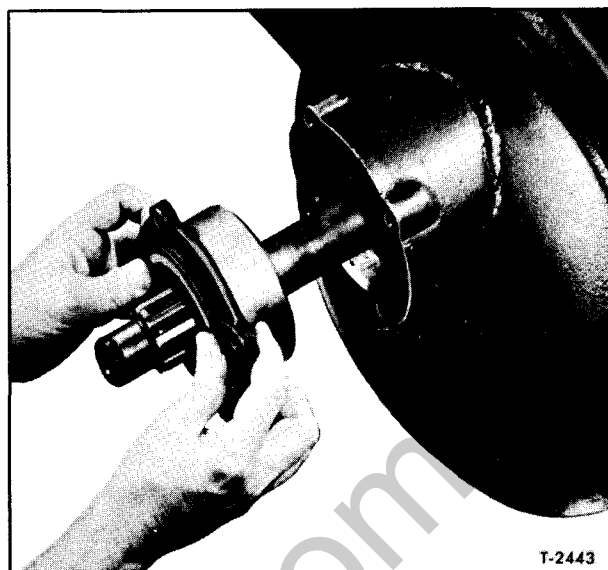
Removal or Installation of Thru-Shaft Rear Bearing, and Retainer
